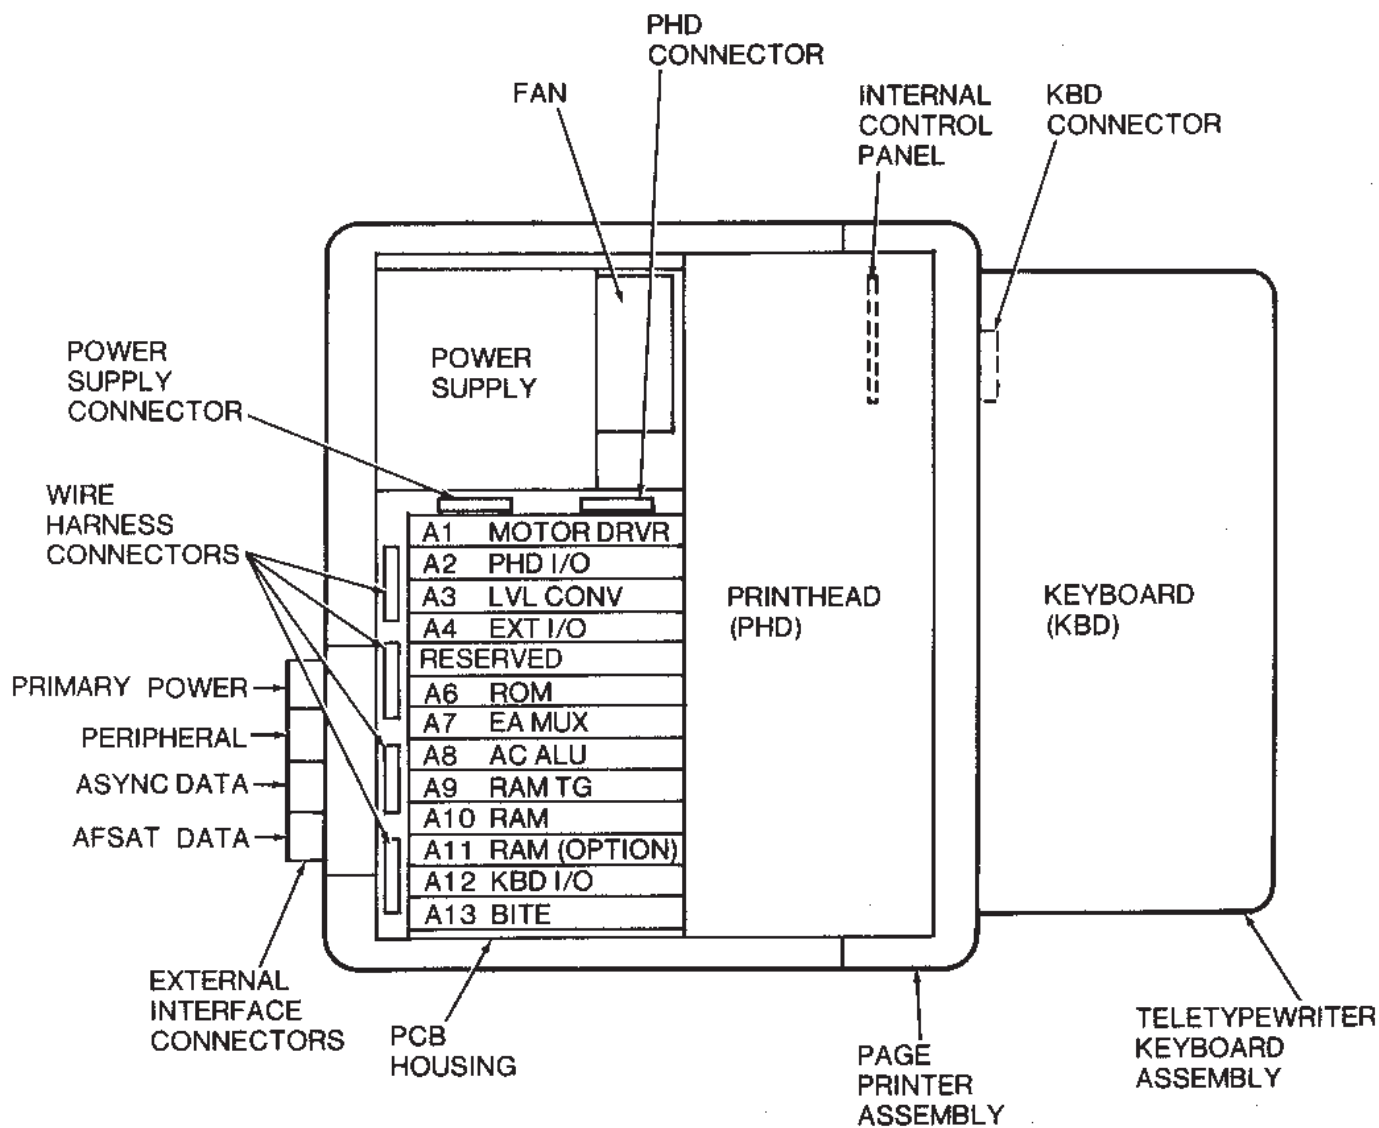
AN/UGC-129 Assembly/Subassembly Layout
